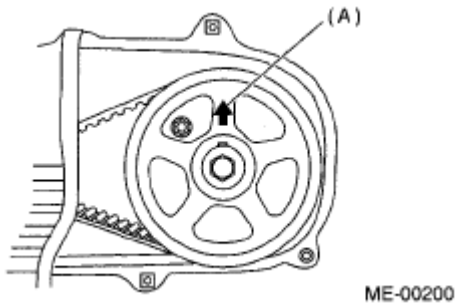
Identifying Arrow Mark On Cam Sprocket
